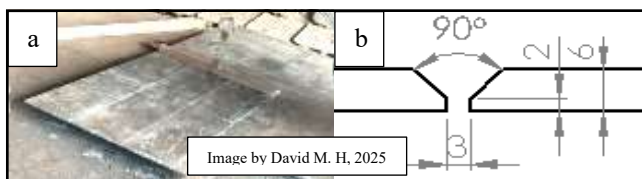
(a) SS400 steel material, (b) Weld joint bevel dimensions
